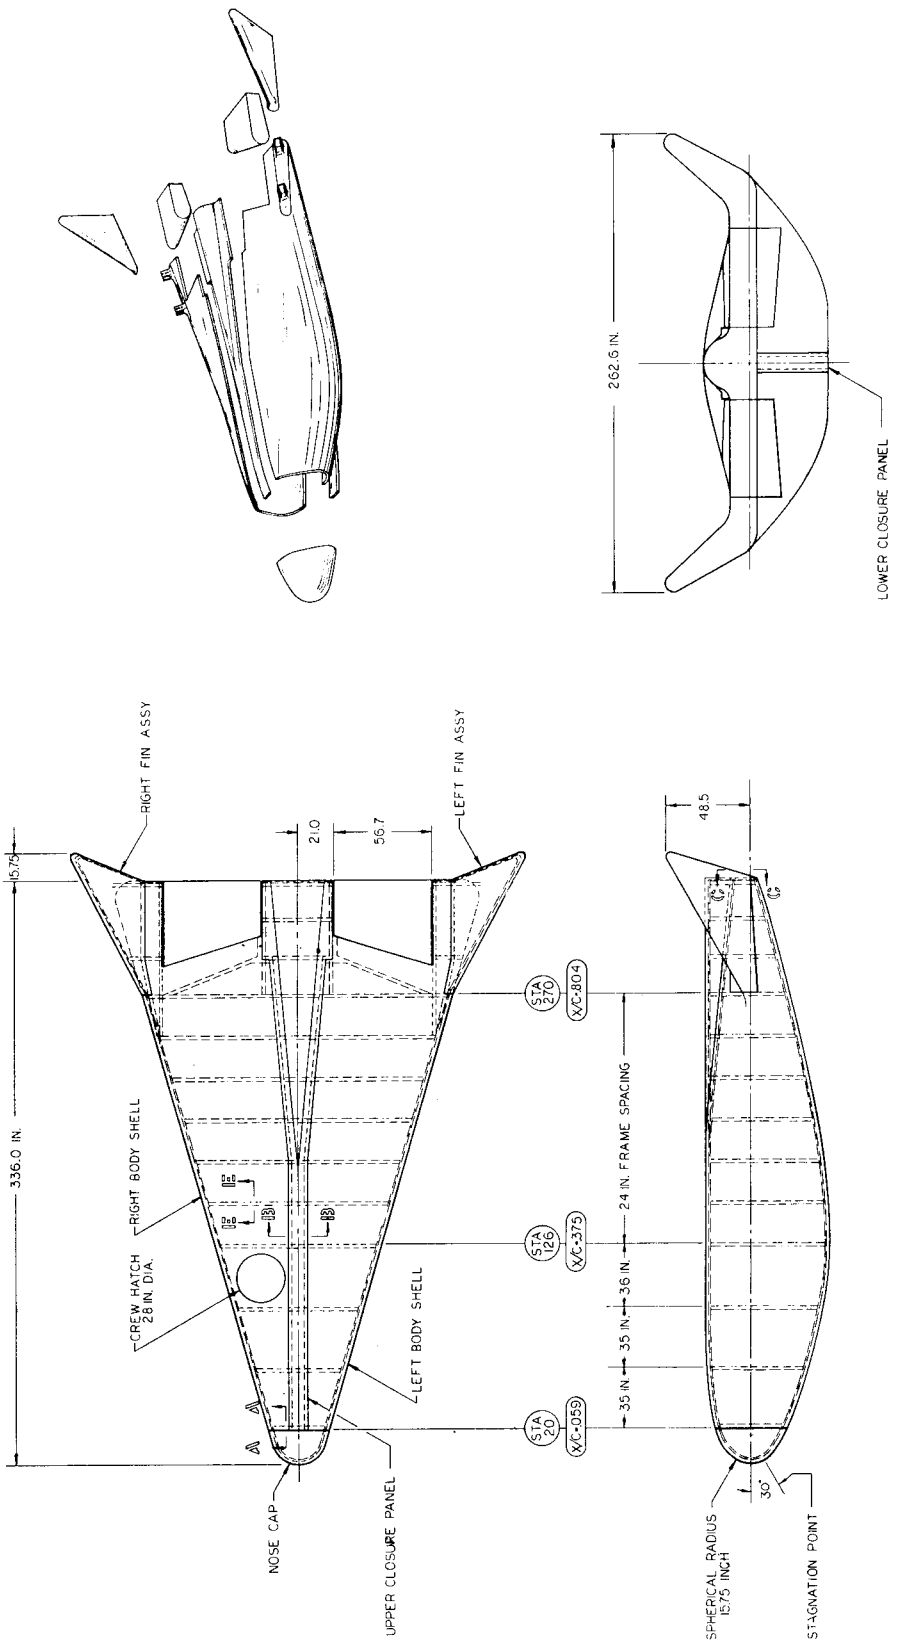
STRUCTURES ARRANGEMENT, DOUBLE WALL CONCEPT, FIBERGLASS SHELL
